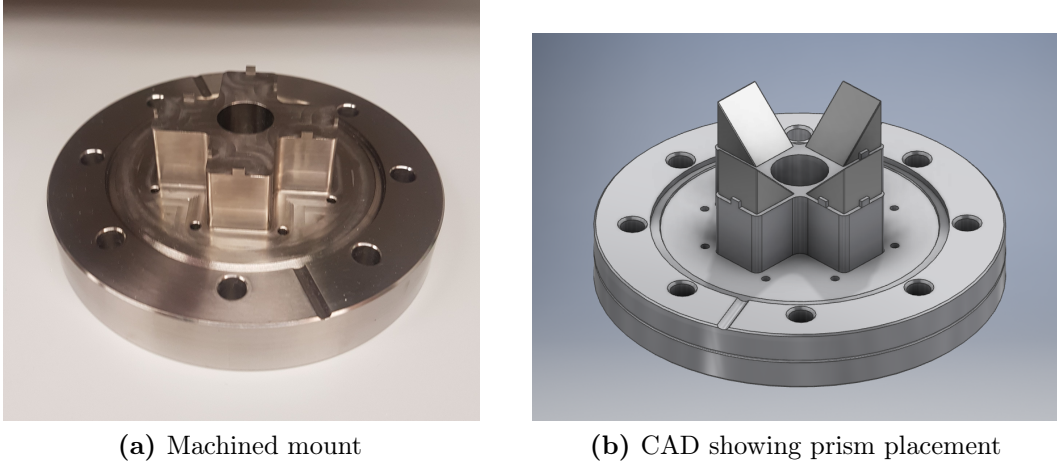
Custom designed and built flange DN63-DN16 reducer flange used for mounting of the cold atom generating prisms (3D MOT).
